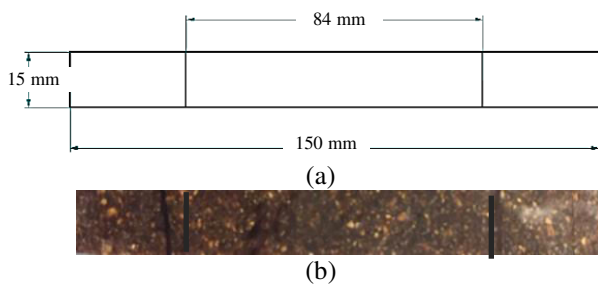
Tensile test specimen dimensions, (a) as per ASTM 3039 and (b) coconut shell reinforced polymer composite.
